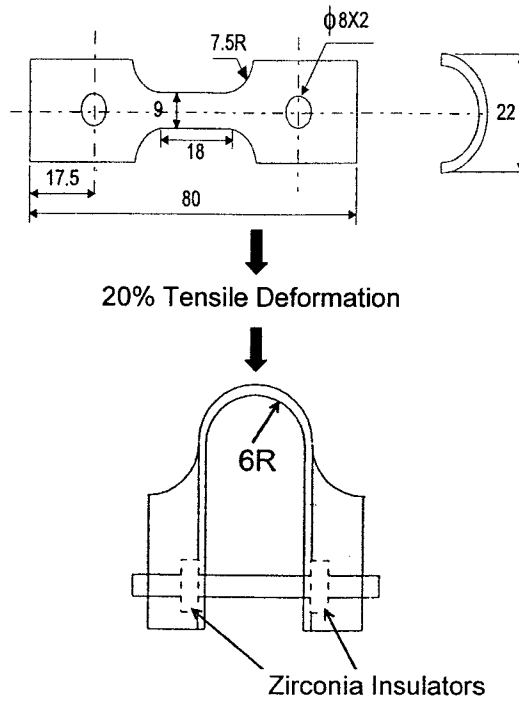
Schematic drawing and dimensions of the modified reverse U-bend (RUB) specimen.(Unit: mm)
